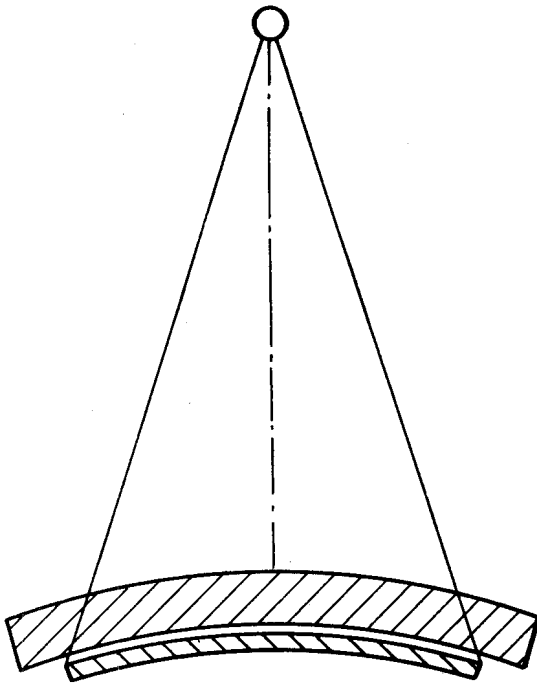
ARRANGEMENT IV, SINGLE WALL PENETRATION, OBJECT WITH CURVED WALLS, SOURCE ON CONVEX SIDE, FILM ON CONCAVE SIDE
